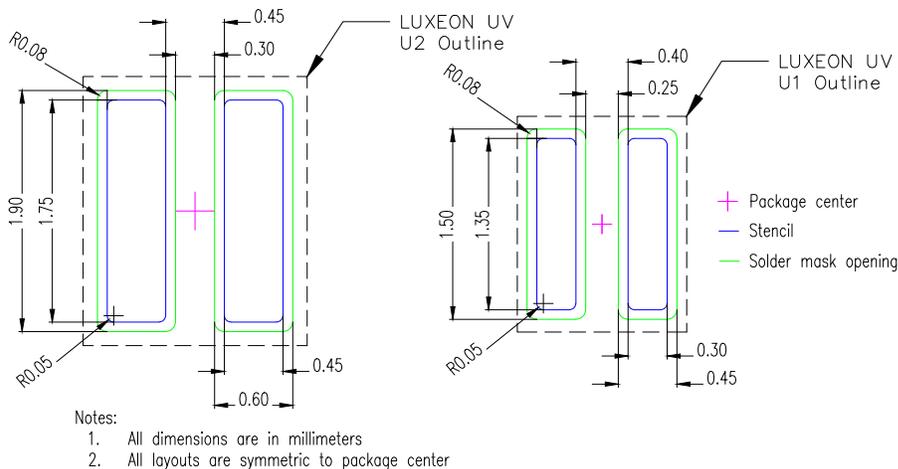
Recommended PCB Footprint for LUXEON UV U Line.
